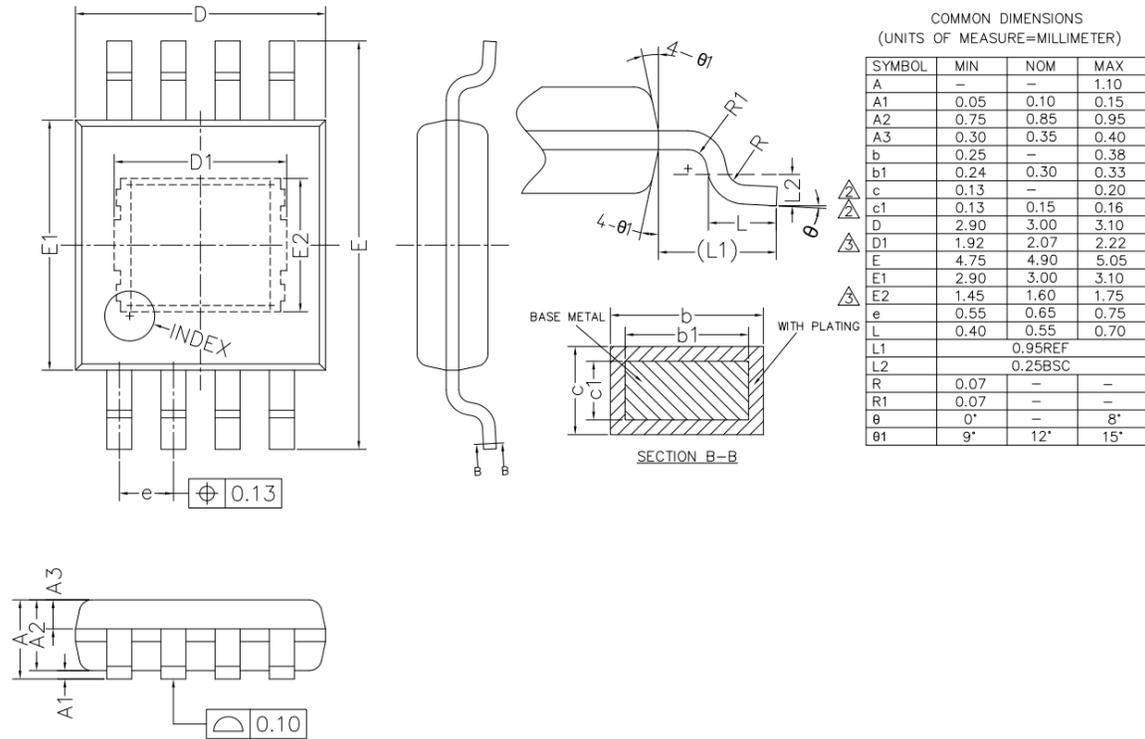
HMSOP-8 Package Shape and Dimension in millimeters
